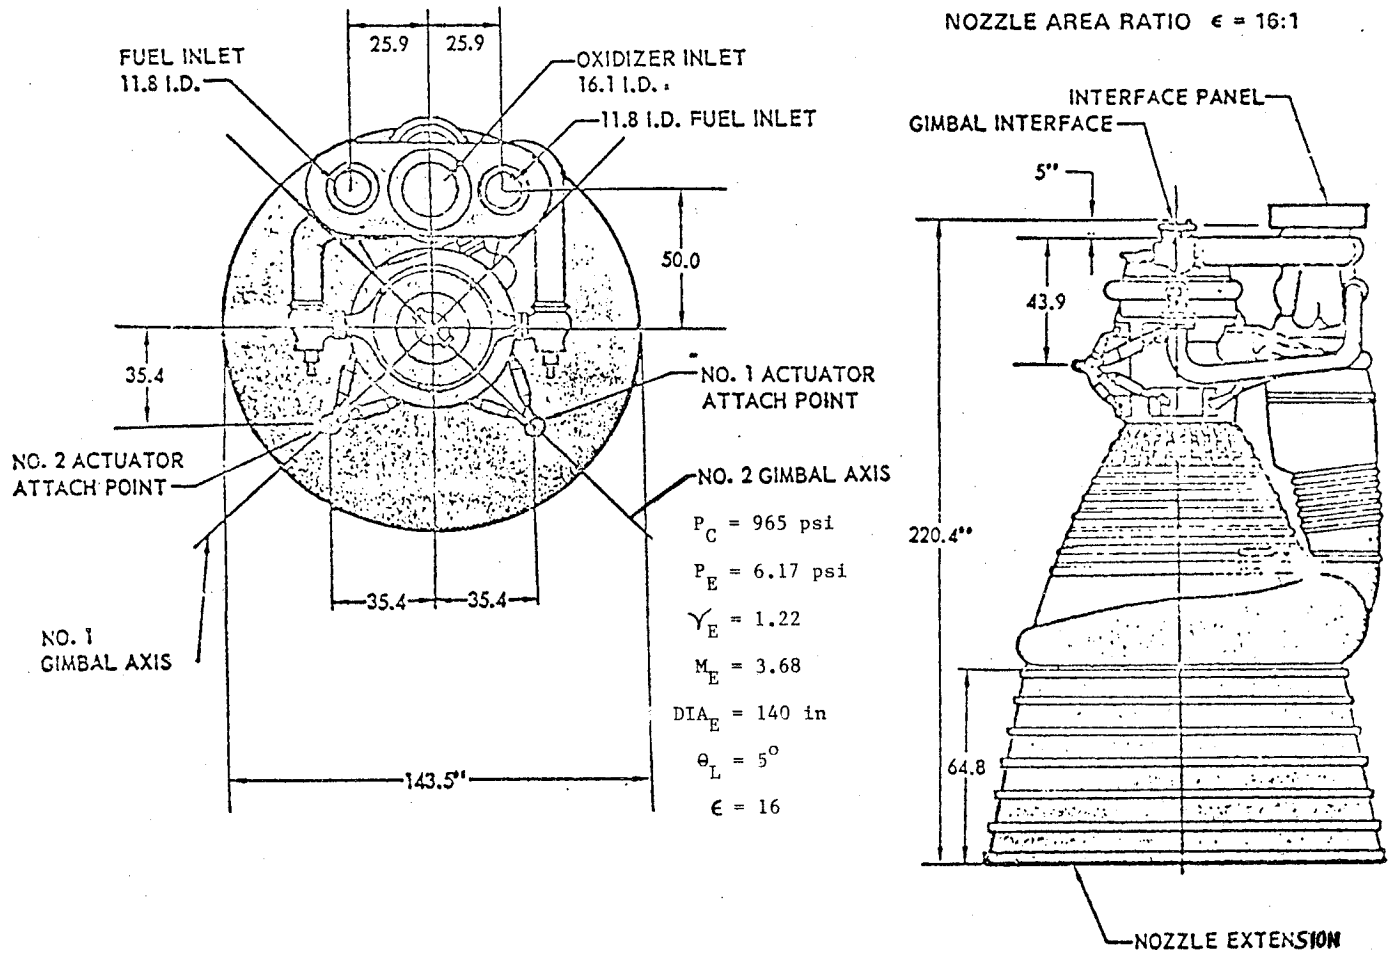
Saturn V, F-1, Engine Dimensions
